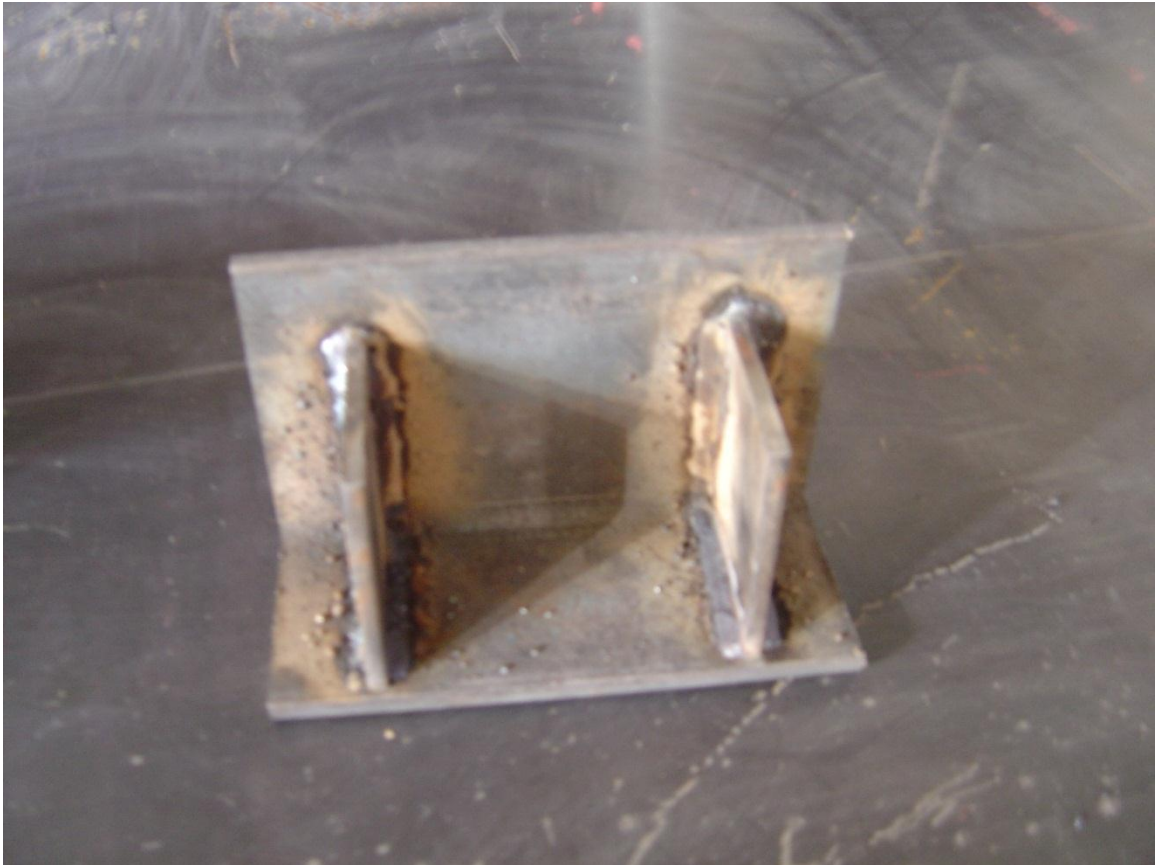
End-angle complete with 10mm weld plates
